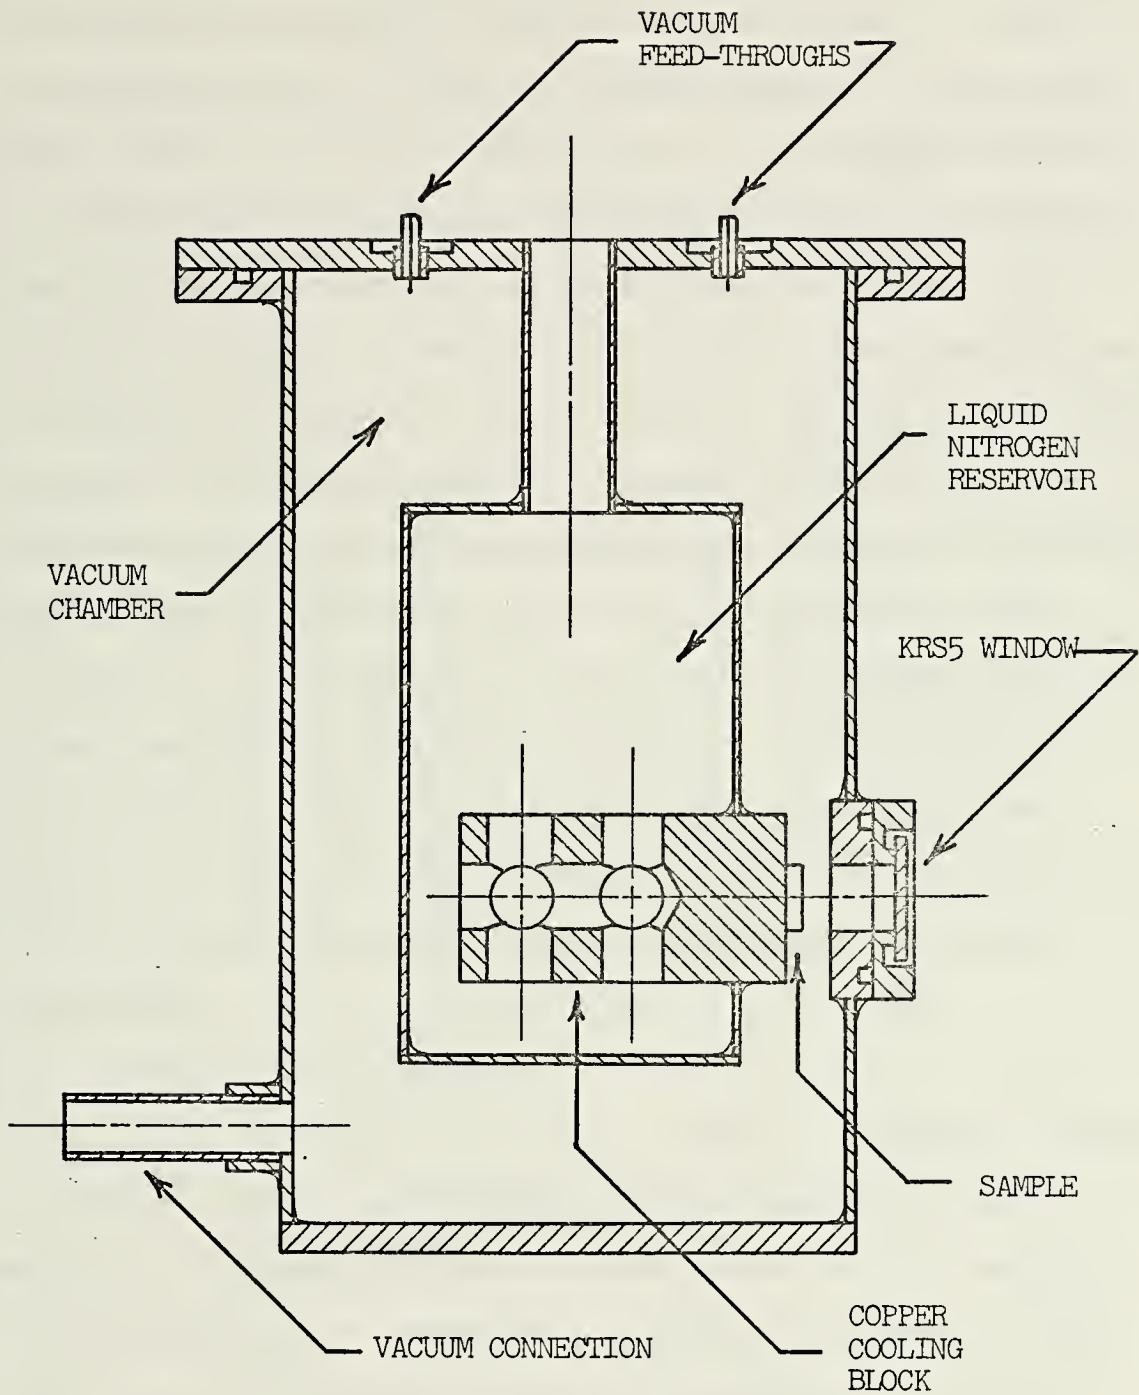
SECTIONED DRAWING OF THE NEW VACUUM DEWAR SYSTEM
